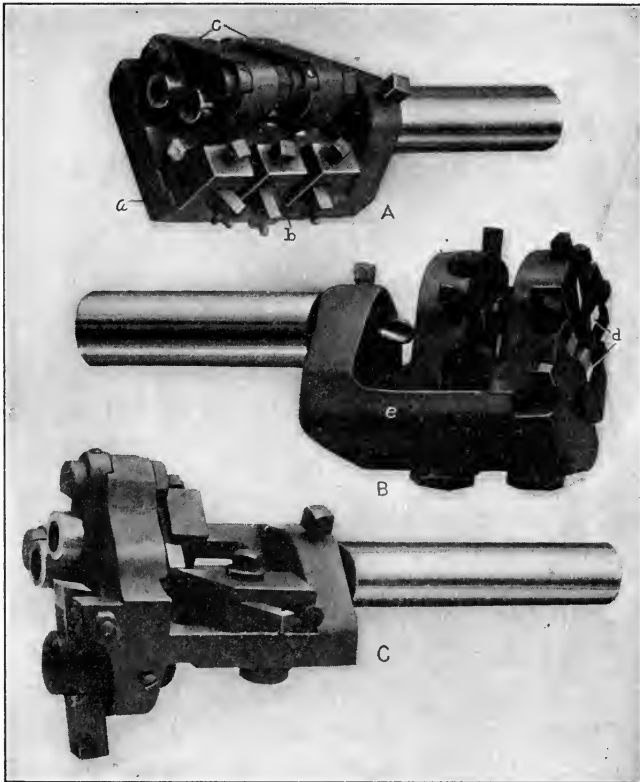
Multiple Turning Tool, Adjustable Hollow Mill, and Standard Three-tool Box-mill
